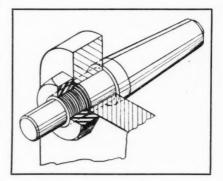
Drawing of support with double-ended design for use when jig must be turned upside down.
